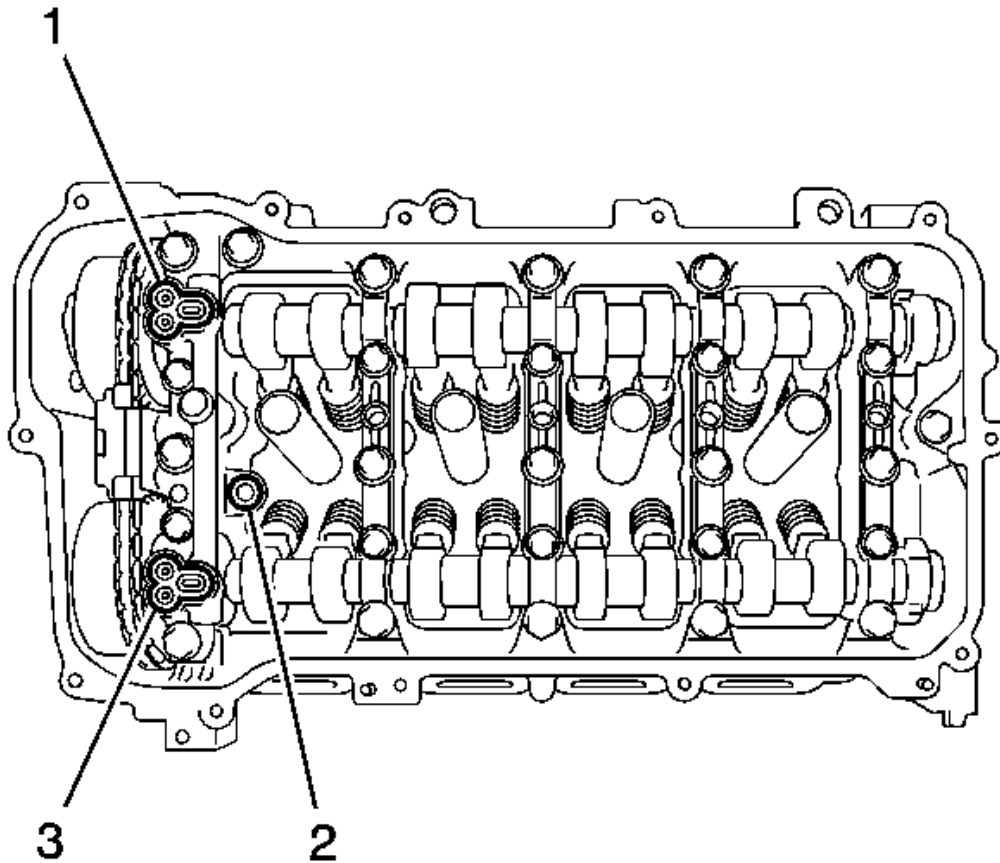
Identifying Camshaft Bearing Cap Gaskets
